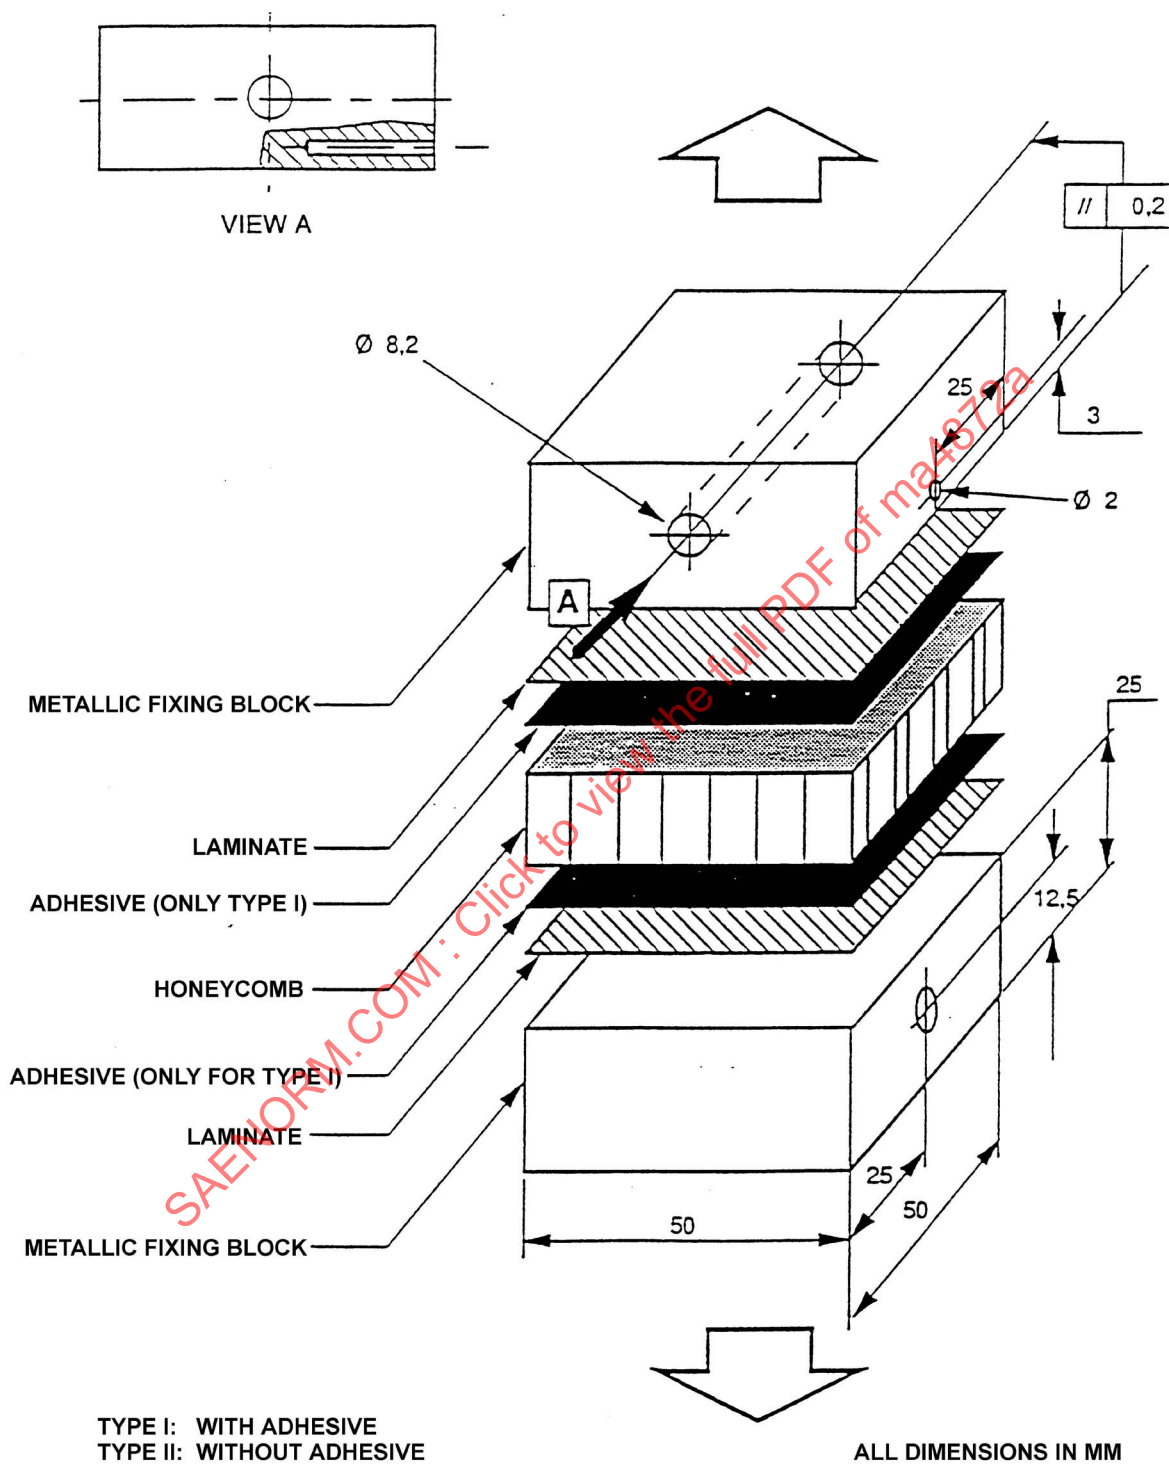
Flatwise Tensile Specimen With Test Fixture
